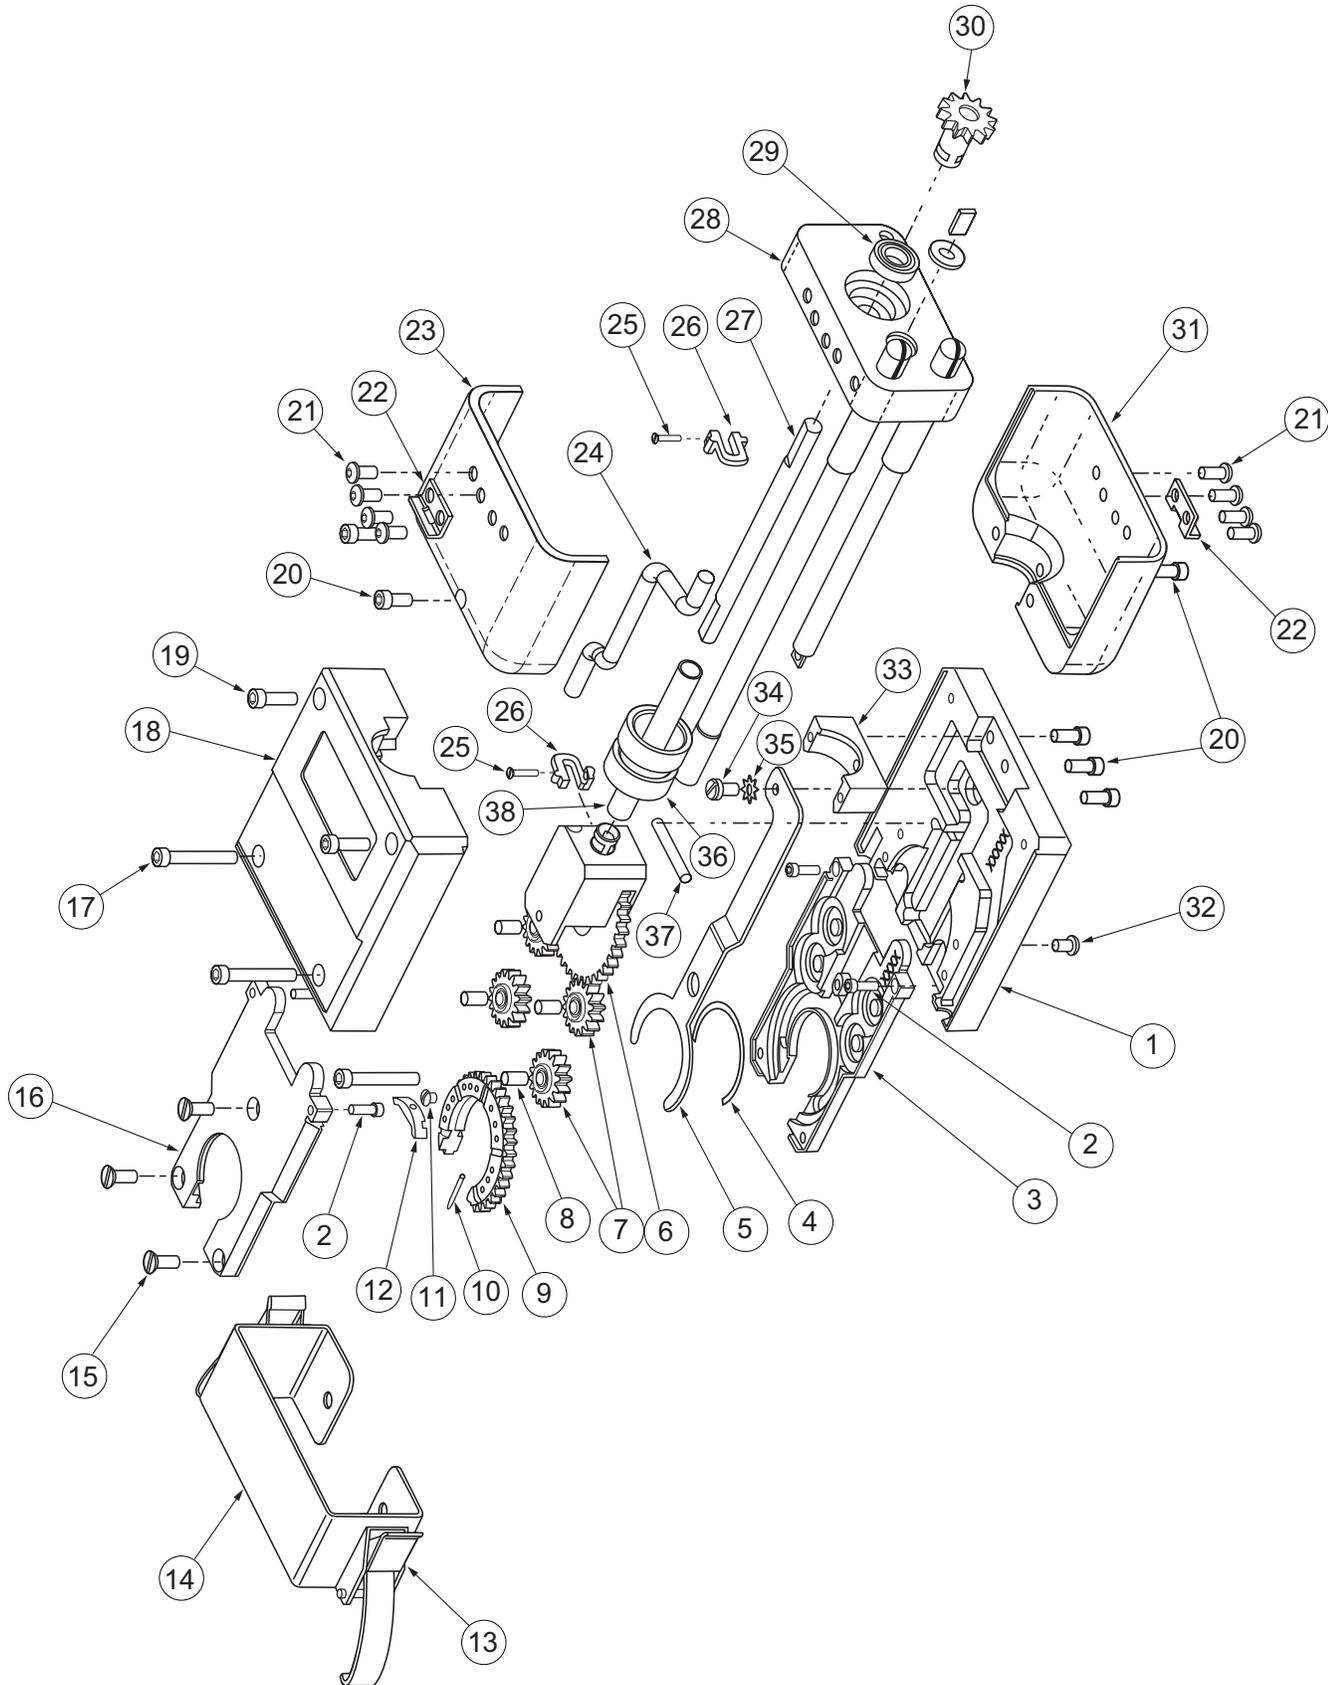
SWS-8MRH-B Rigid Weld Head
